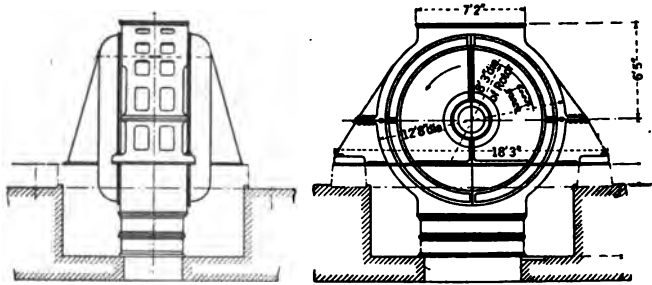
TWELVE-POLE—8750-KV-A.—6600-VOLT—500-REV. PER MIN.—THREE-PHASE GENERATOR
